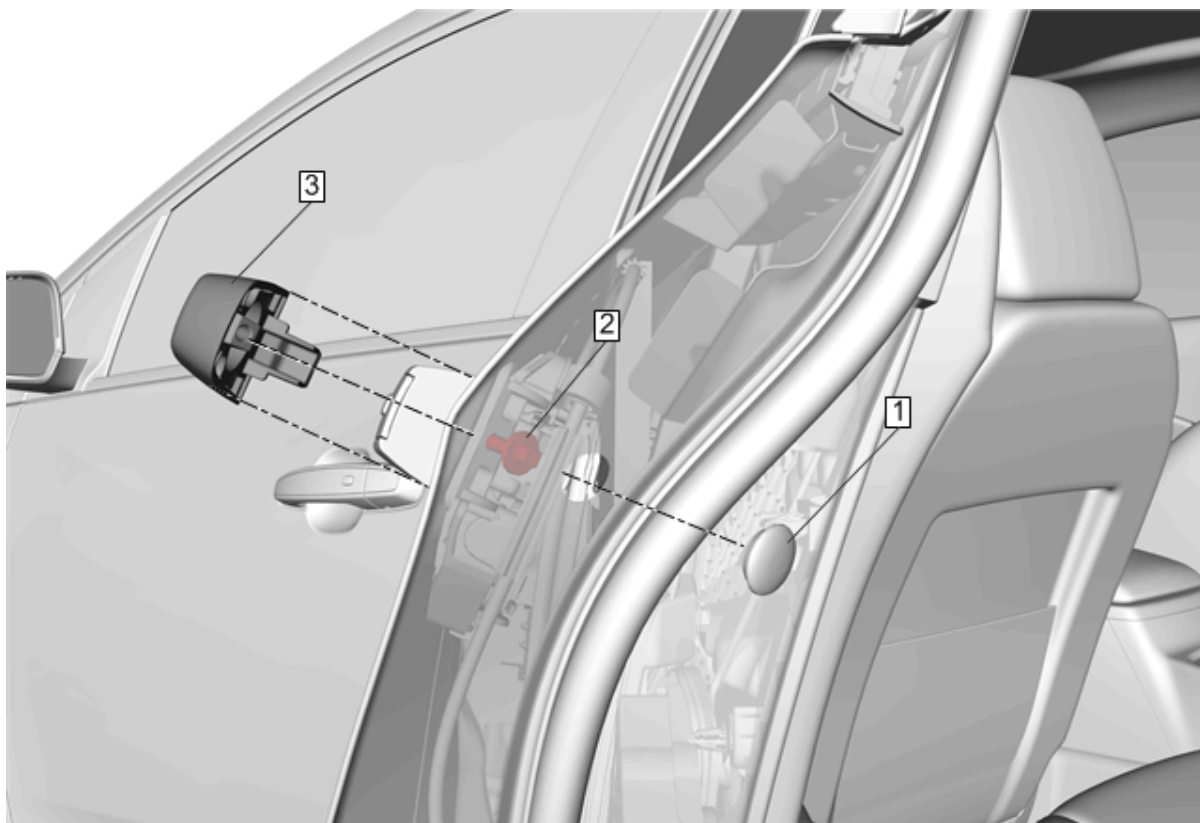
Rear Side Door Lock Cylinder Opening Cover
